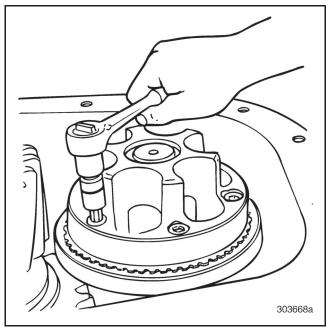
Removing Planet Pinion Gear Cage Allen-Head Capscrews
